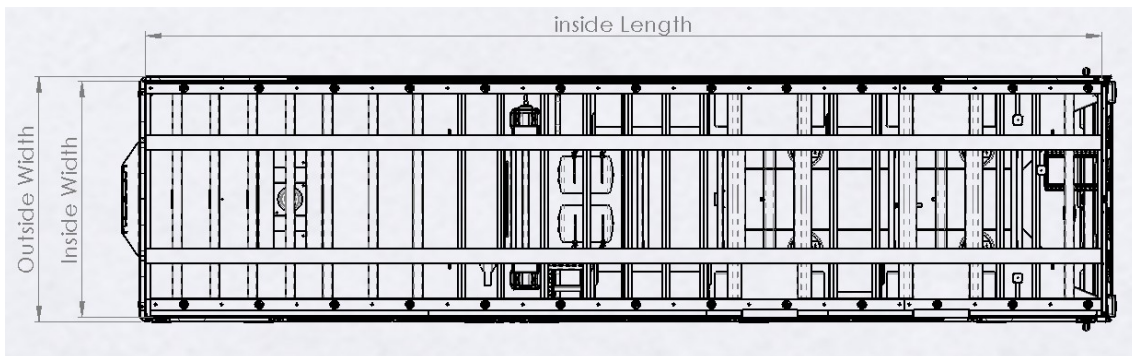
Shows the main dimensions of the semi-trailer seen from above.
